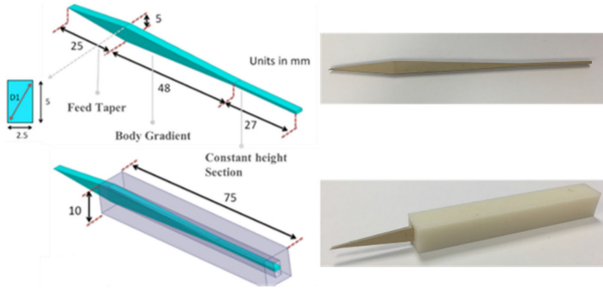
Proposed multilayer DRA geometry and key dimensions, showing the inner core (top) and multilayer design (bottom).
